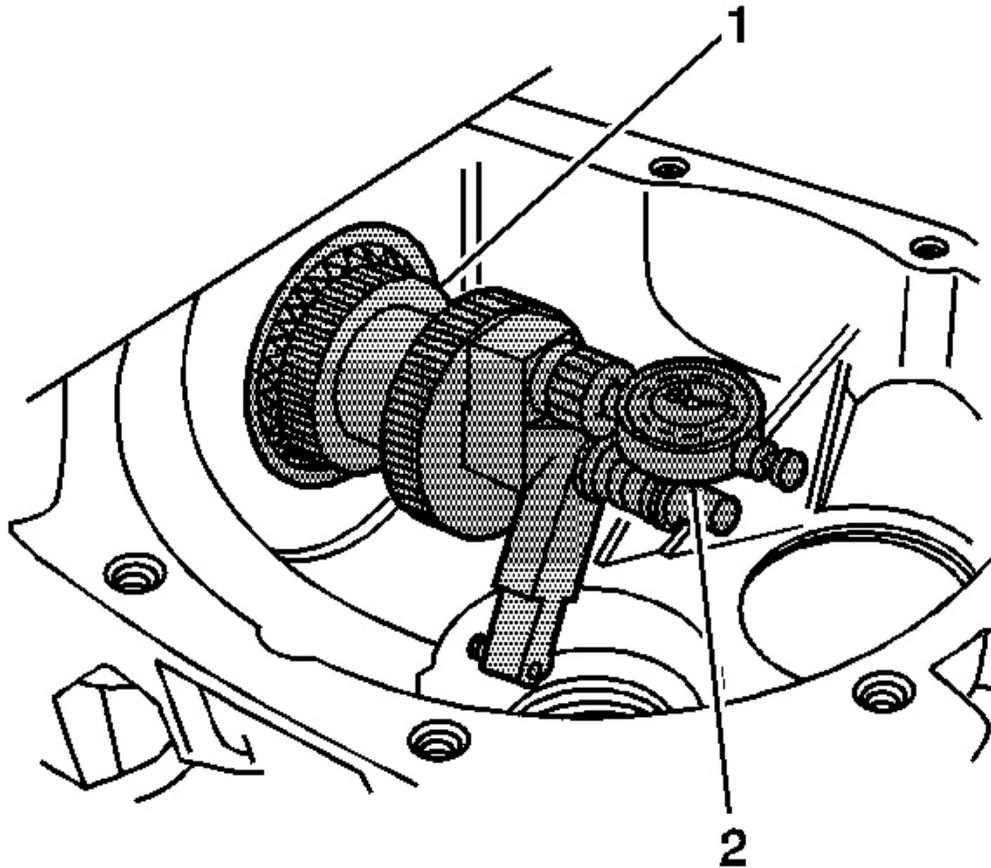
Adjusting J 29763 To Differential Bearing Bore
